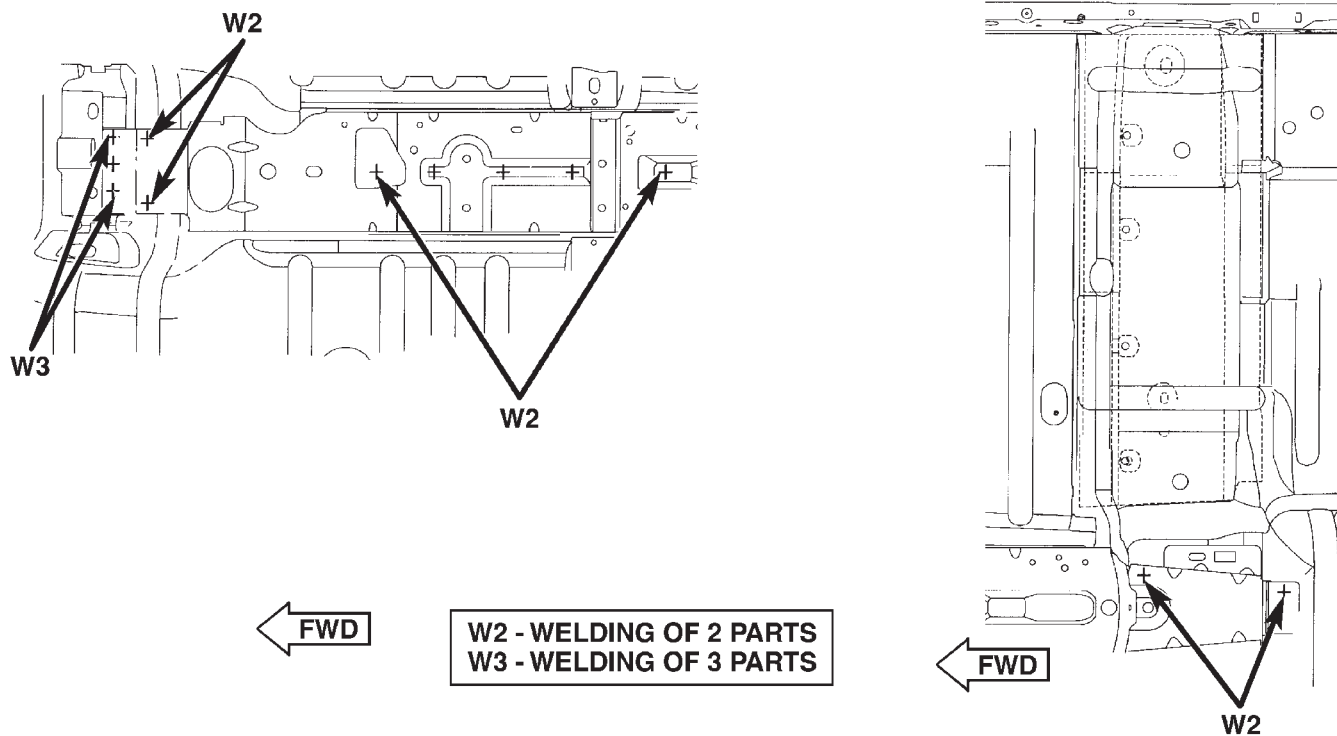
FRONT SEAT TRACK CROSSMEMBER TO FRONT FLOOR PAN
